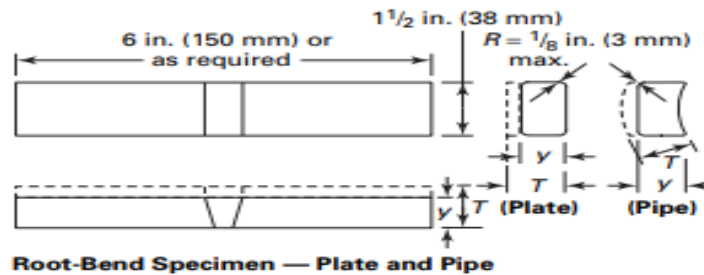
Bending Test of Root Bend ASME Code QW-462.3 (a) Standard.
